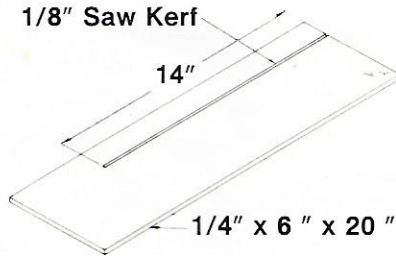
The dimensions of the splitter alignment fixture are 1/4" x 6" x 20". When making the cut, make sure the rip fence is aligned in its proper position.
